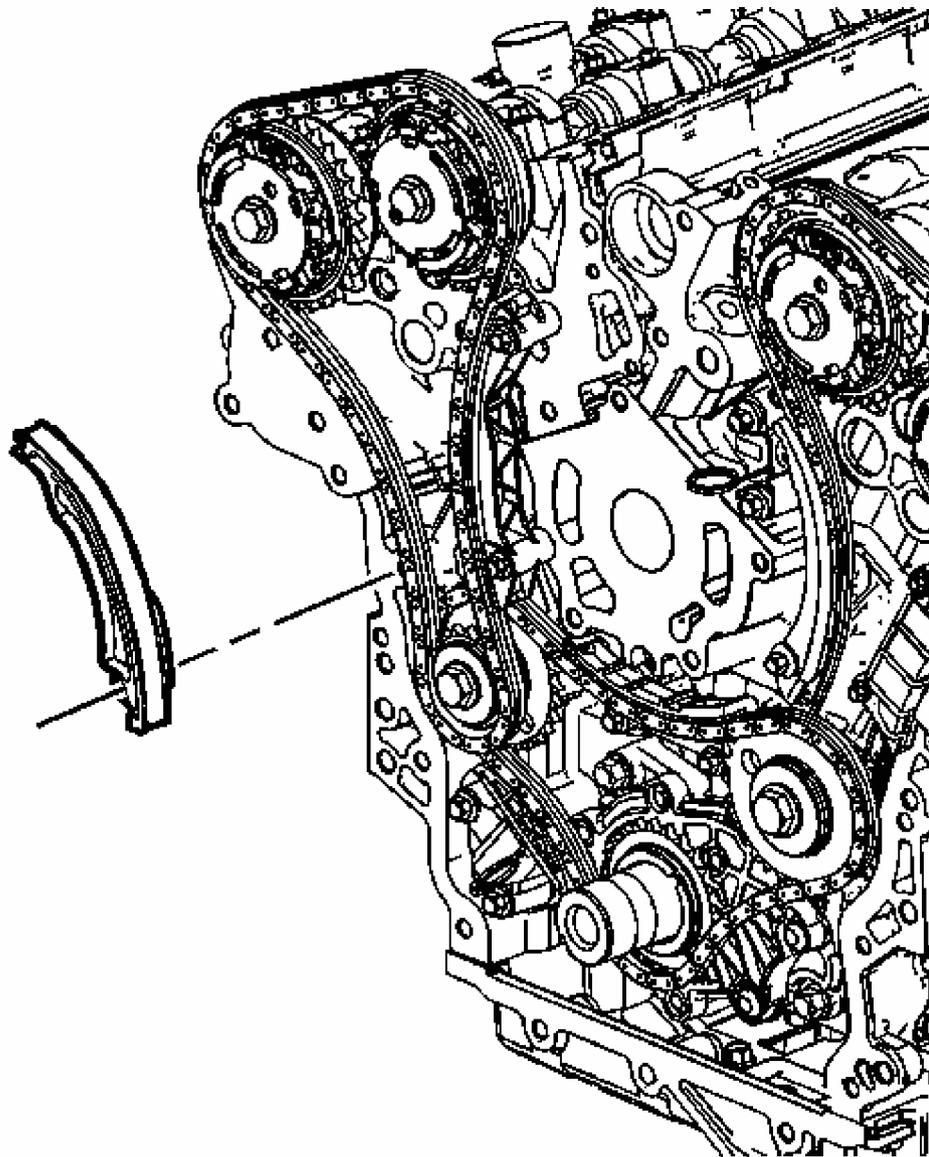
View Of Right Secondary Camshaft Drive Chain Shoe
